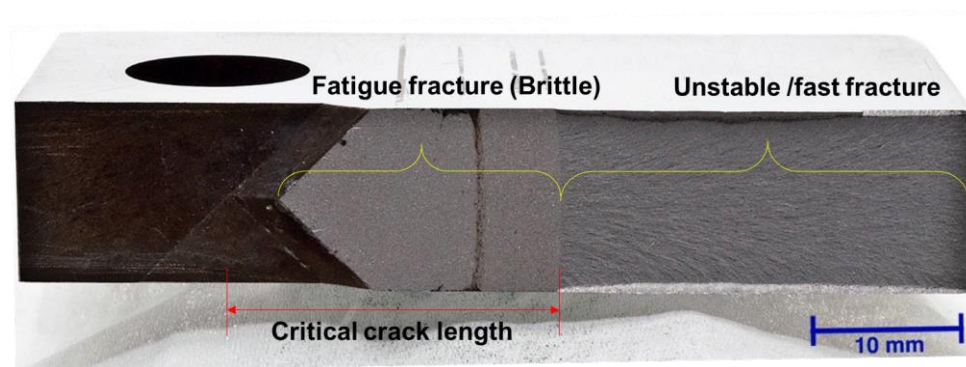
Fracture surface of 300M steel plain-strain fracture toughness specimen
